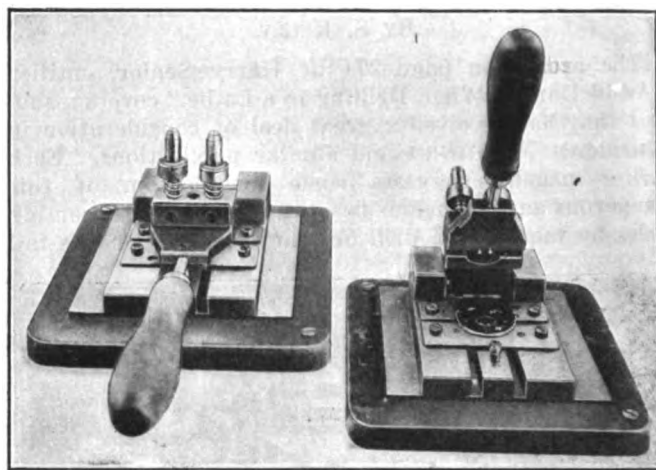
THE FIXTURE IN OPEN AND CLOSED POSITION
